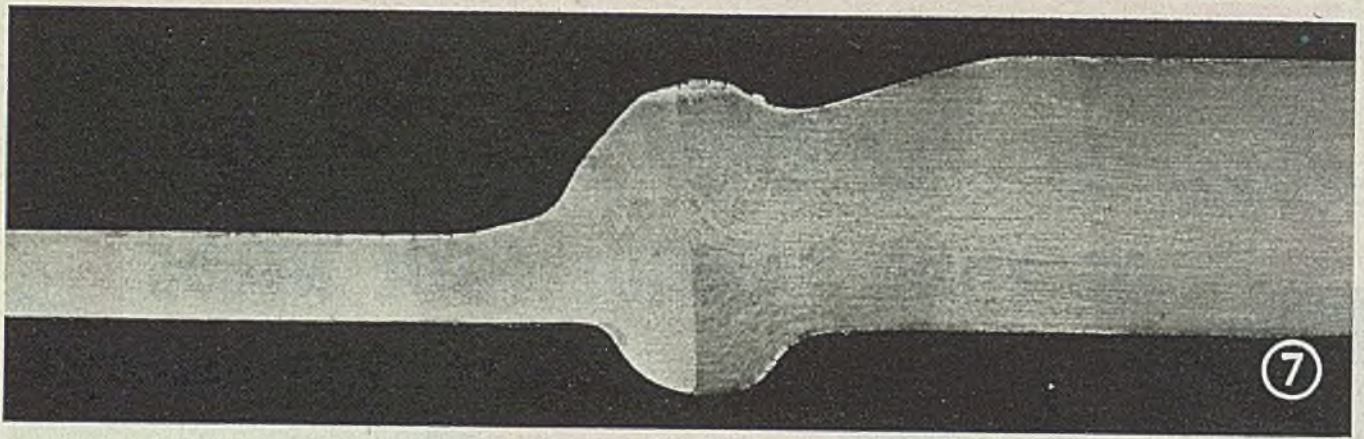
Photomicrograph through pressure weld in oil well tool joints after torch normalizing but before machining to final dimensions. Weld was made partly up taper which joins thin-walled drill pipe on top to heavy-wall tool joint. On completion of welding, reinforcement is removed from inside of joint and from taper on outside
